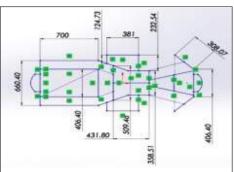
Chassis Design with All Dimensions are in (millimeter)
